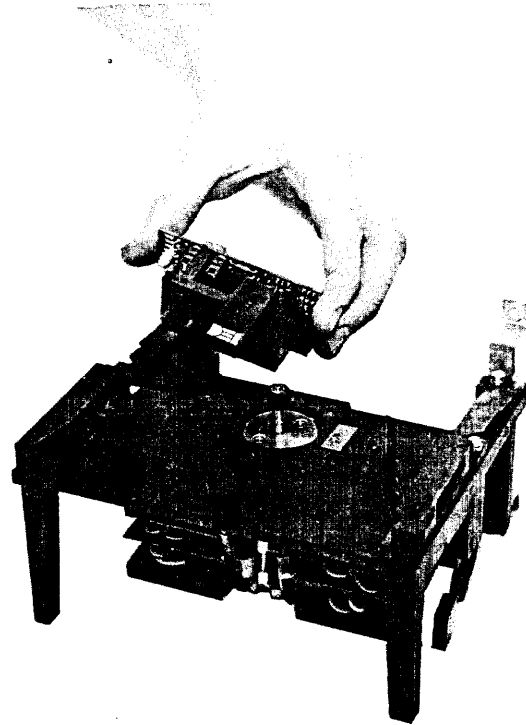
MAGNETIC HEAD ASSY REMOVAL
